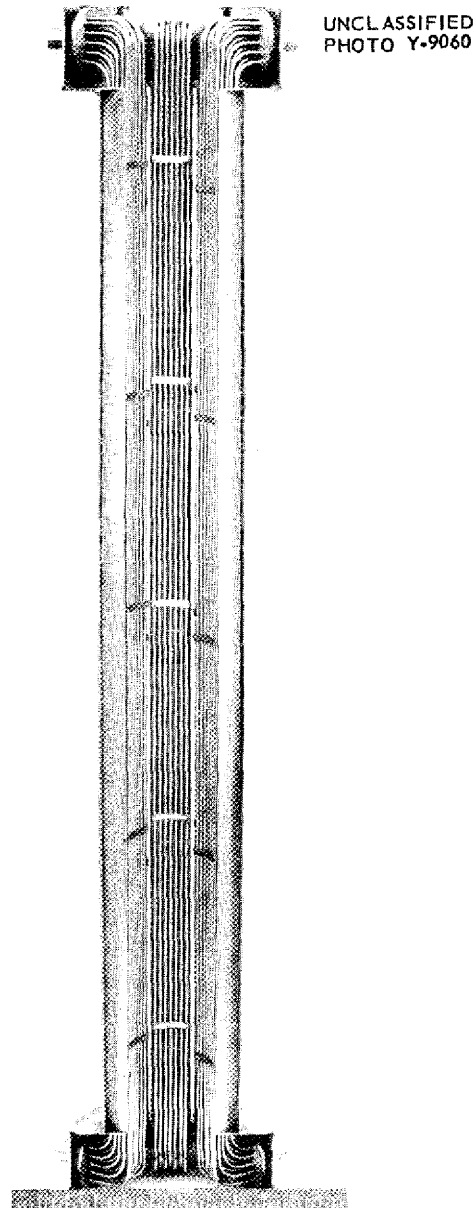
Three Tube Bundles Welded into Half Section of Cylindrical Six-Tube-Bundle Liquid-to-Liquid Heat Exchanger. Note spacers.
